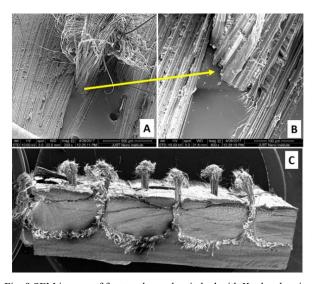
SEM images of fractured sample stitched with Kevlar showing (A) A single Kevlar stitching thread with the epoxy matrix and carbon fibers (B) The adhesion between the thread's multi filaments and the epoxy (C) 3D view of the fractured sample
